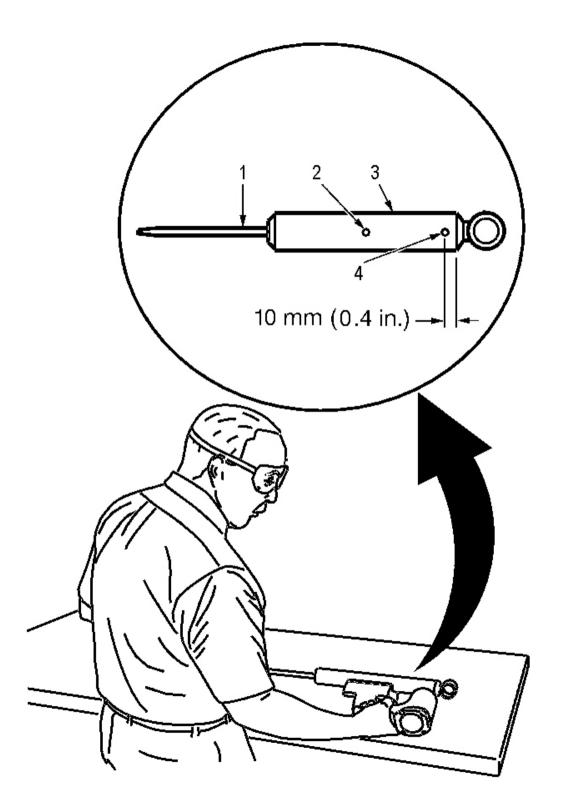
Making An Indentation 10 mm (0.4 in) From The Bottom Of The Tube Courtesy of GENERAL MOTORS CORP.
